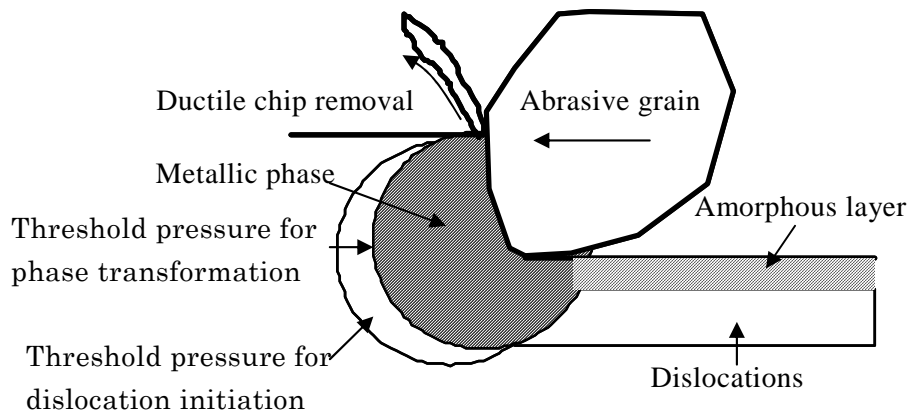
Schematic model for subsurface damage mechanism in silicon during ductile machining ^[63]
